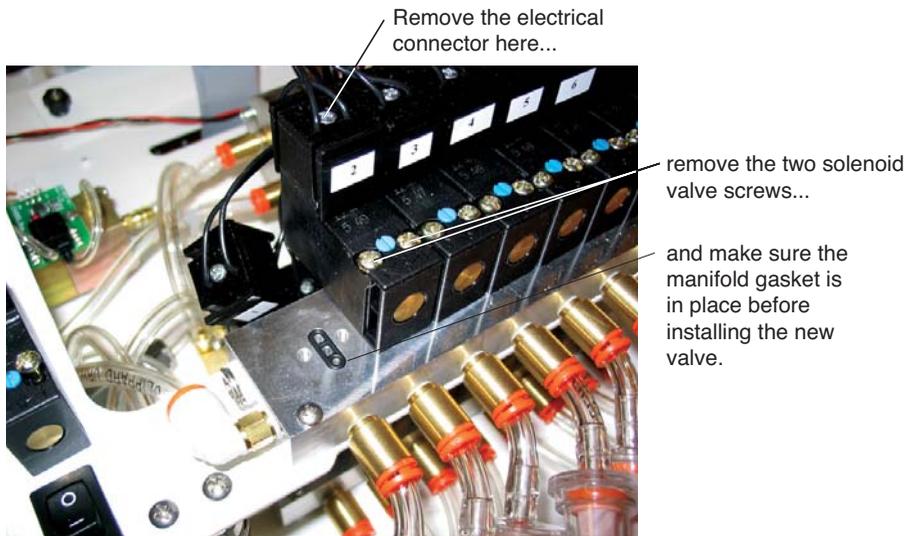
Remove the electrical connector, remove the valve, and make sure the manifold gasket is in place before installing new valve.
